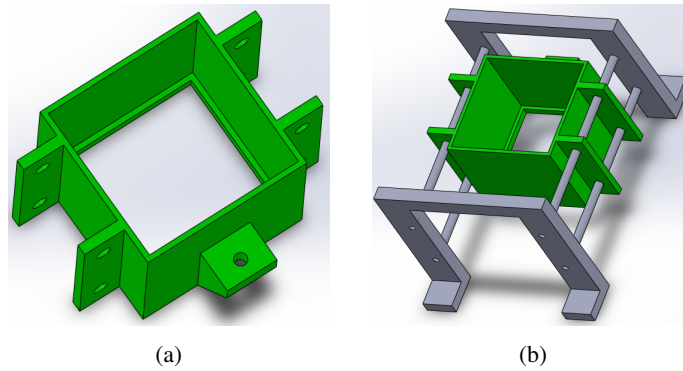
The box where the phantom will be placed and translated. The box in a) is $7 \times 7 \times 6 \text{ cm}^3$. It will be placed in a custom-made cage system consisting of four metal rods and two 3D-printed cage walls, as shown in b).
